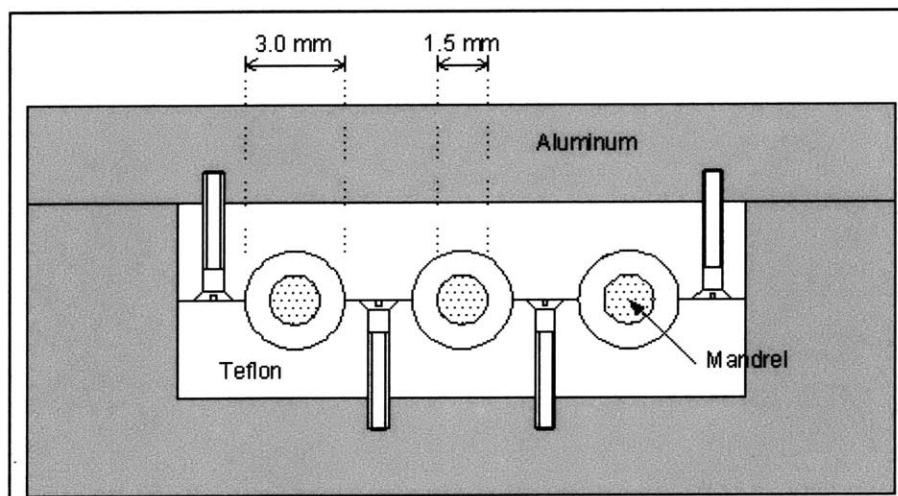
Schematic of assembly of outer mold leaves and placement of mandrels to form tubular geometry.
